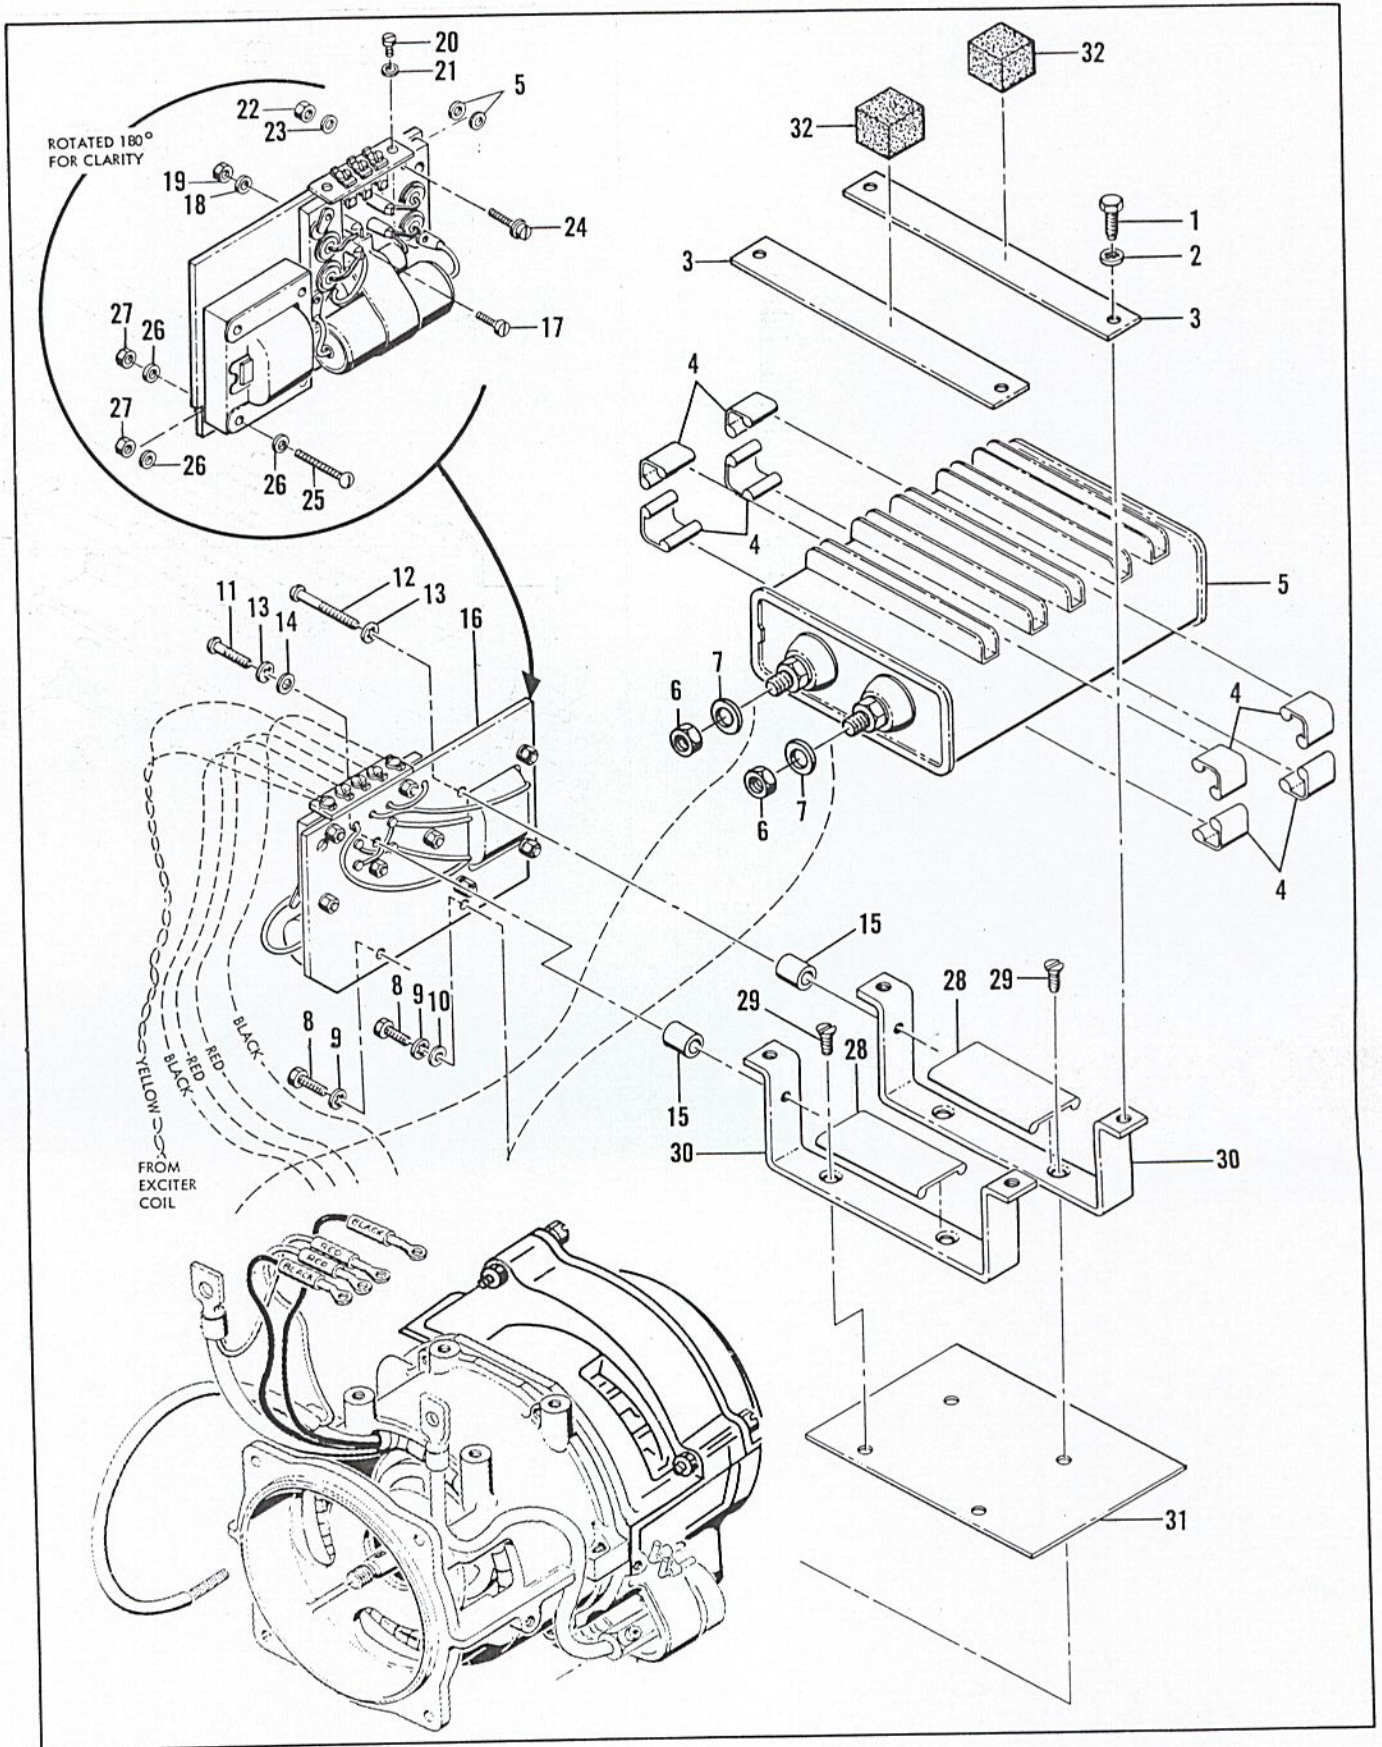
McCULLOCH 170 ARC WELDER - EXPLODED VIEW (CONT)
